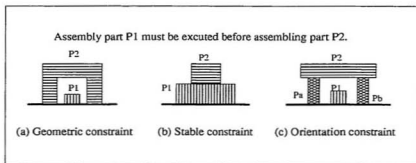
Illustrations of assembly constraints for robotic assembly.
